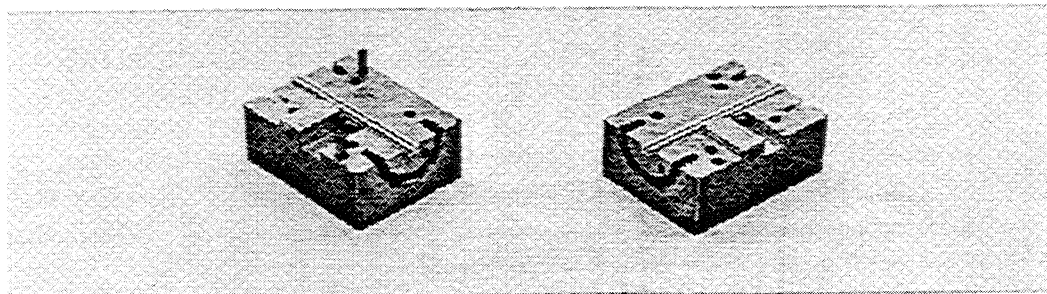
The photo shows our waveguide mounting block split into its two halves. A waveguide half-channel is mounted in each of the two mounting block pieces.
